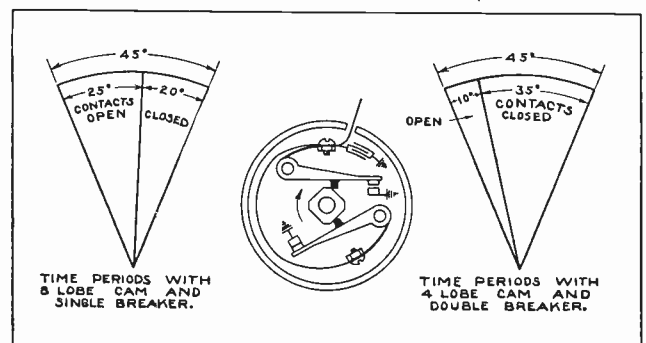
Diagram showing construction of breaker mechanism for high-speed distributor and also showing periods of time which contacts remain open and closed with both single breaker and double breaker distributors.
